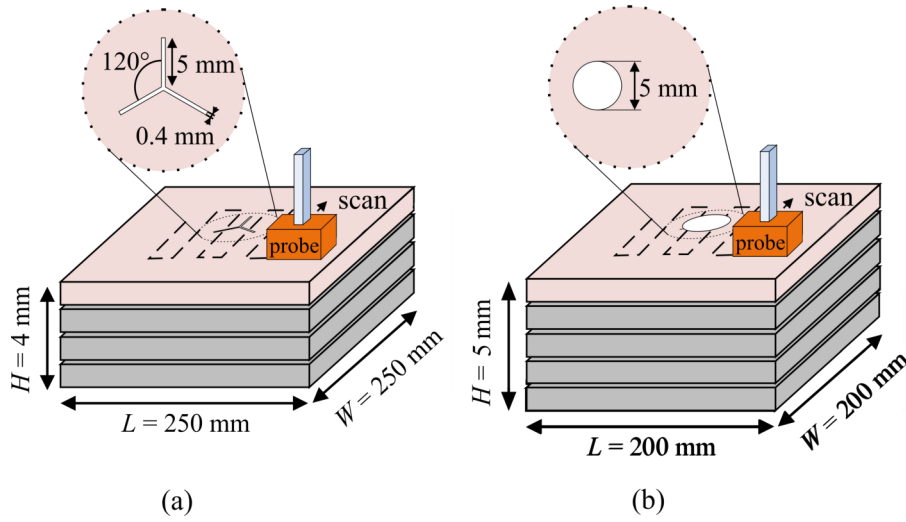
Measurement setups: (a) First setup: A scan with the double coil planar ECE probe is performed to evaluate the stack of aluminum sheets with one containing a star-shaped defect [50], (b) Second setup: A scan with the single coil planar ECE probe is performed to evaluate the stack of aluminum sheets with one containing a cylindrical shaped defect.
